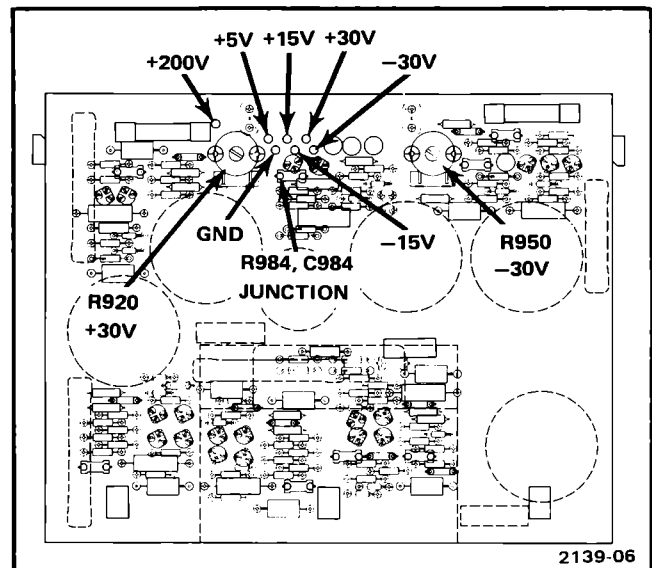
Location of power supply test points and -30 V and +30 V adjustments.
